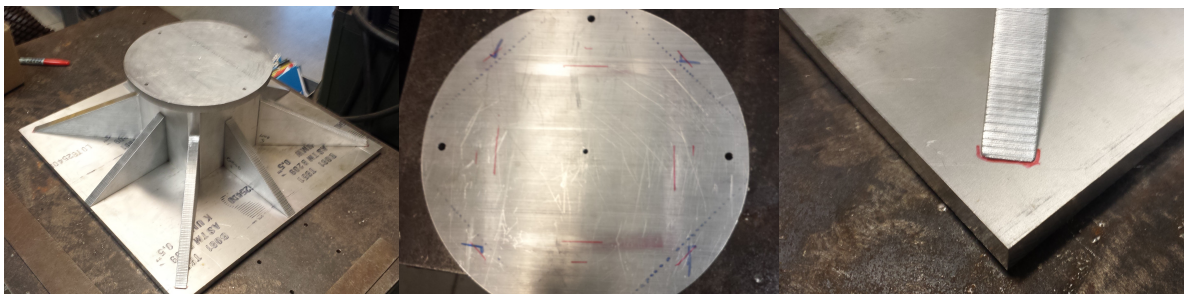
Welding assembly before delivering the parts to Kevin Williams. The center and right images show the bottom and top plates marked, respectively
